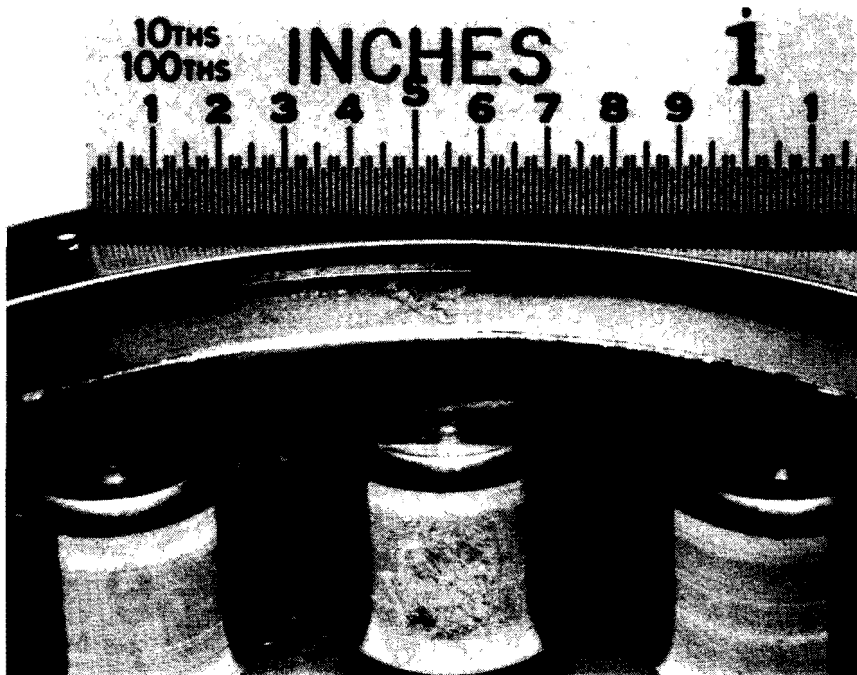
42-Degree Gearbox -310 Bearing Roller Fault C/D,
